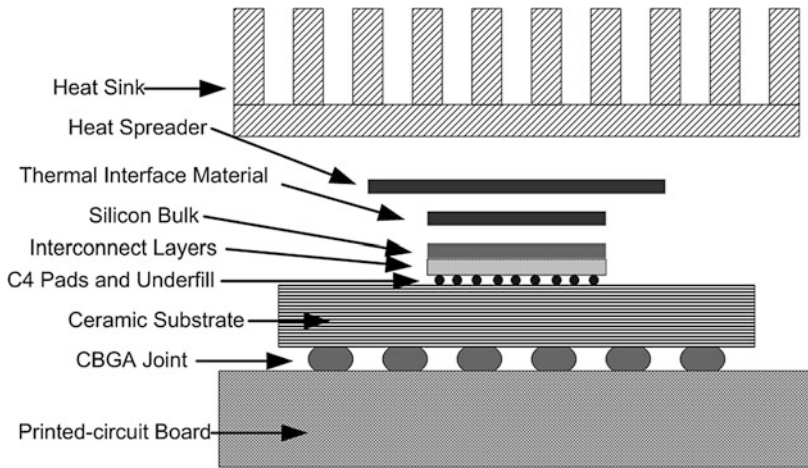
Packaging components in a typical CBGA package, adapted from [15]
